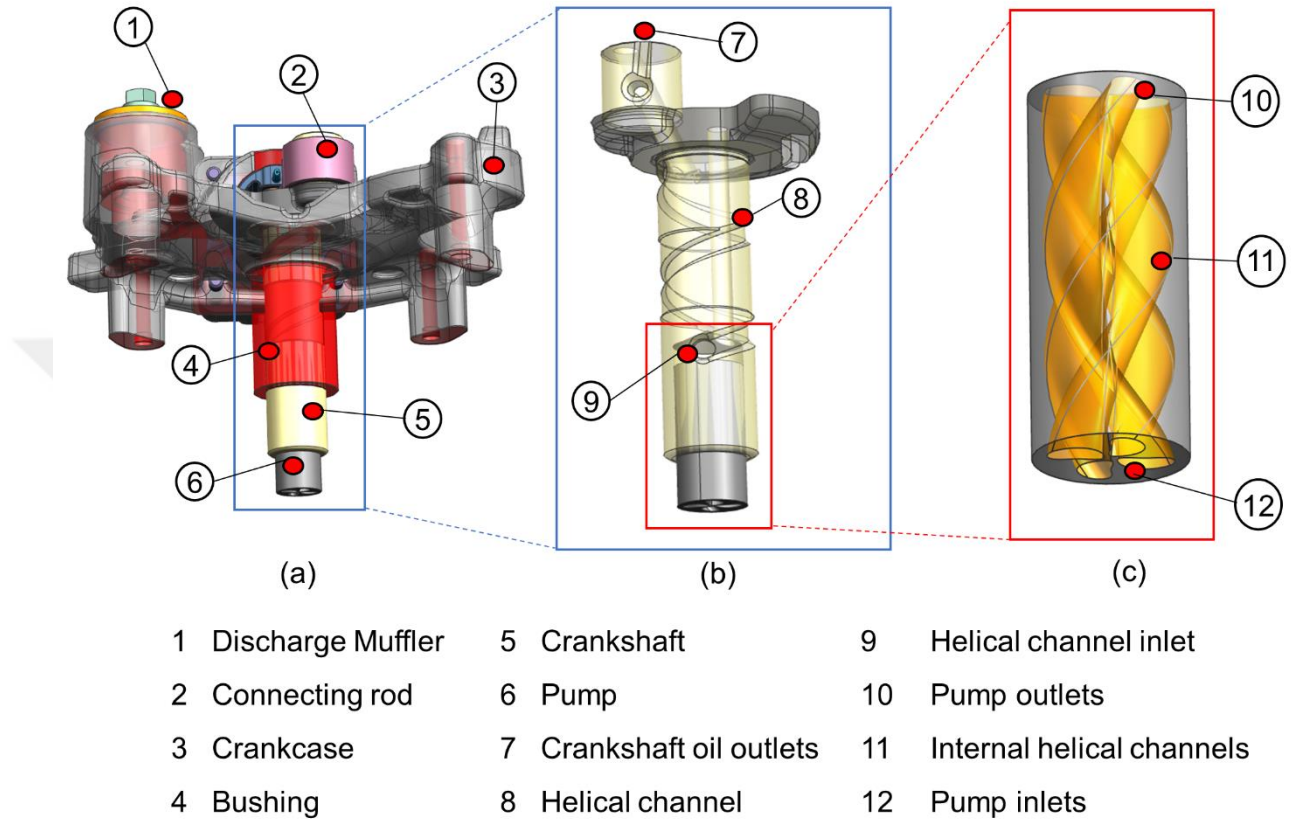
Geometry of the pump system. (a) Compressor crankcase with unibody pump attached to the crankshaft. (b) Unibody axial pump inserted in the crankshaft. (c) CAD model of unibody axial flow pump
